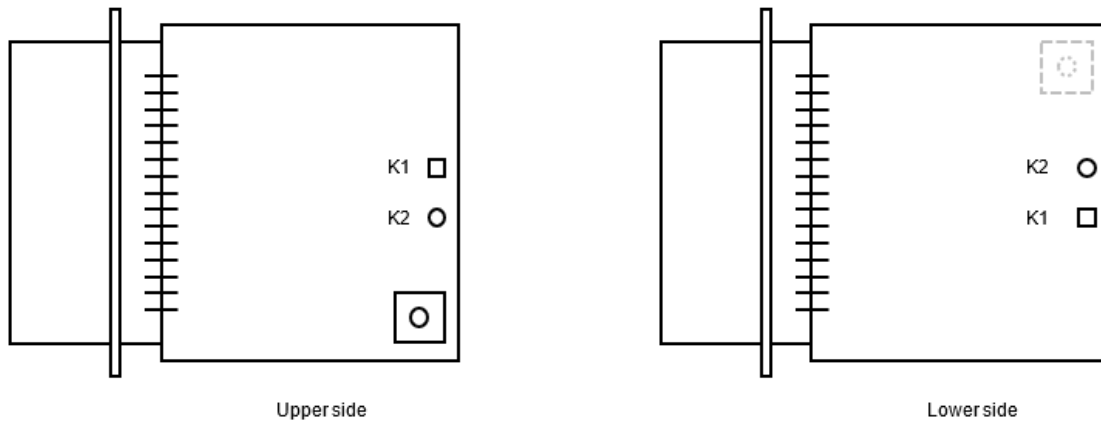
Upper and lower side of the IEPE ±5 VDC sensor plug
